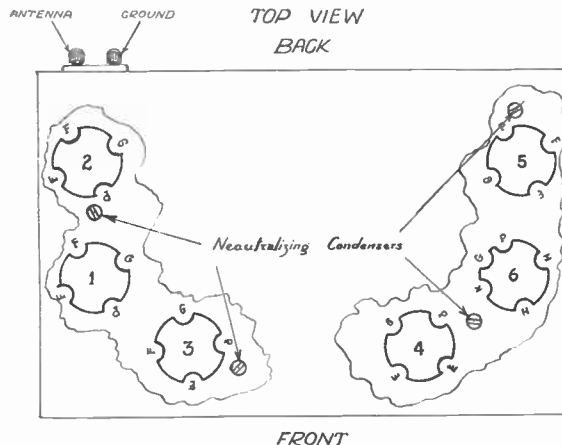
Top view of Radio, showing layout of tubes and neutralizing adjusting screws.
